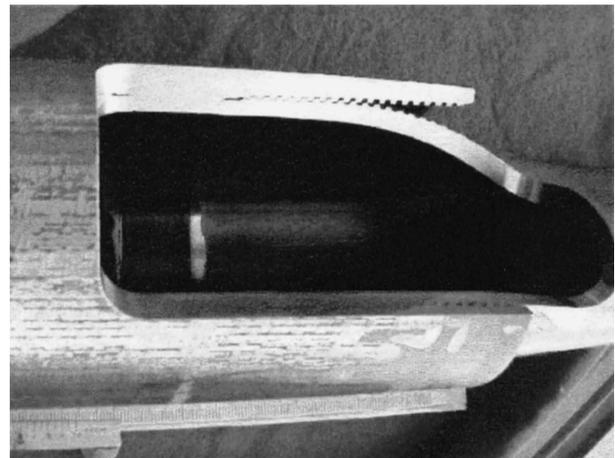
An example of collapsed connection (80 ksi 2-7/8" × 6.4 lb/ft)
